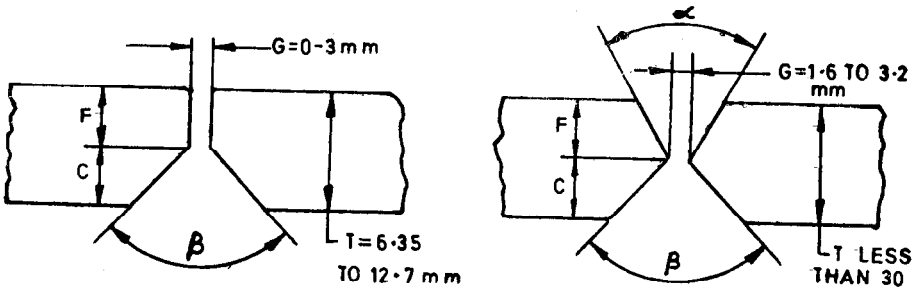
DOUBLE V GROOVE WELDS
